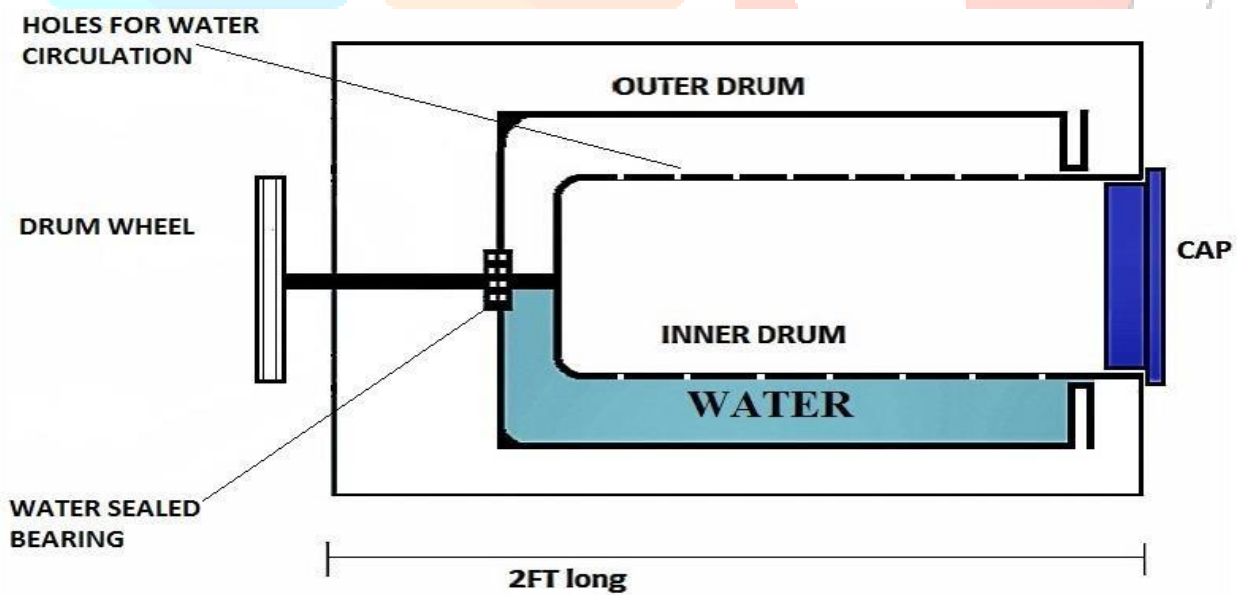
Drum design of pedal powered washing machine (Sectional Side view)
